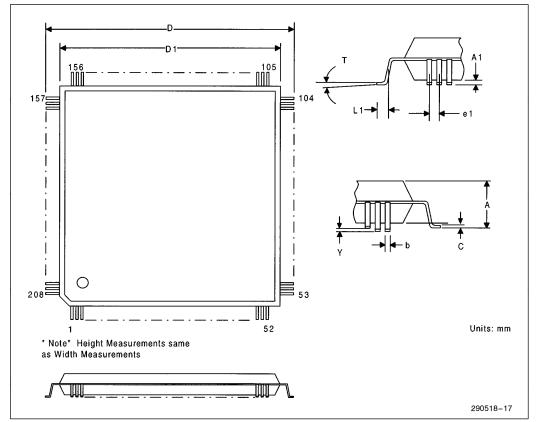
208 Pin Quad Flat Pack (QFP) Dimensions
